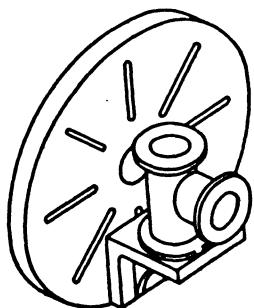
A flanged pipe "T" held on a 90-deg. angle plate for boring and facing.
